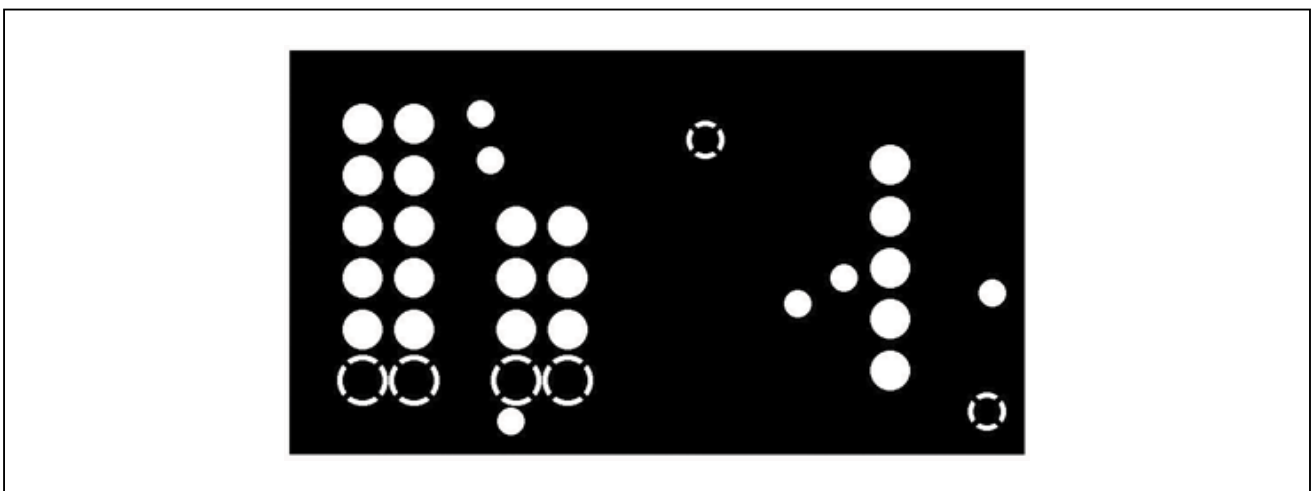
DS1086LPMB11 Peripheral Module PCB Layout—Inner Layer 1 (Ground)
